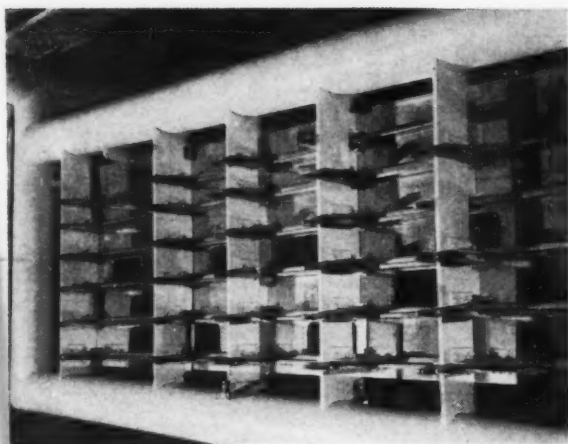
Sheet metal assembly fixture with automatic bucking bars.
